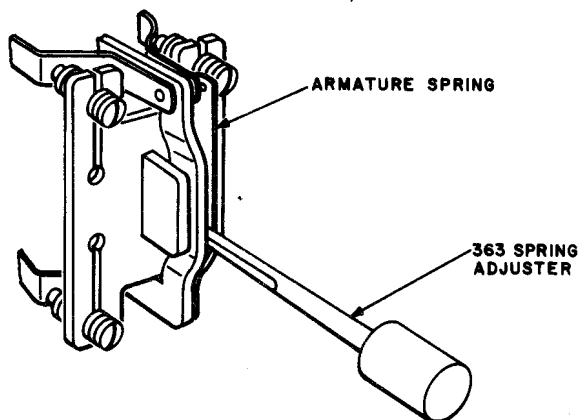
Method of Adjusting Armature Spring for Minimum Front Contact Make
